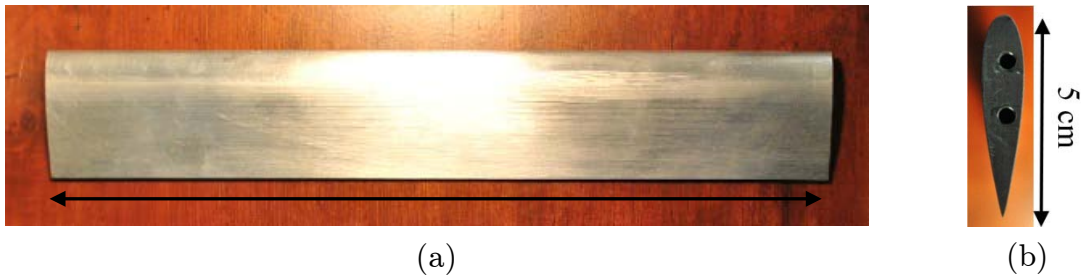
The geometry of the blade (a) side view, and (b) profile section
